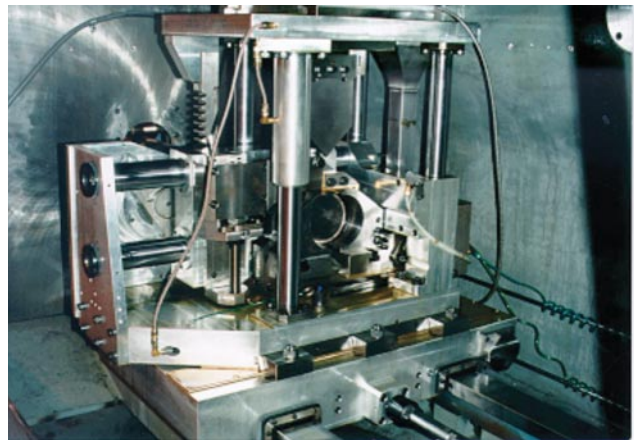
Double cut dieset (photo courtesy of Thermatool)
